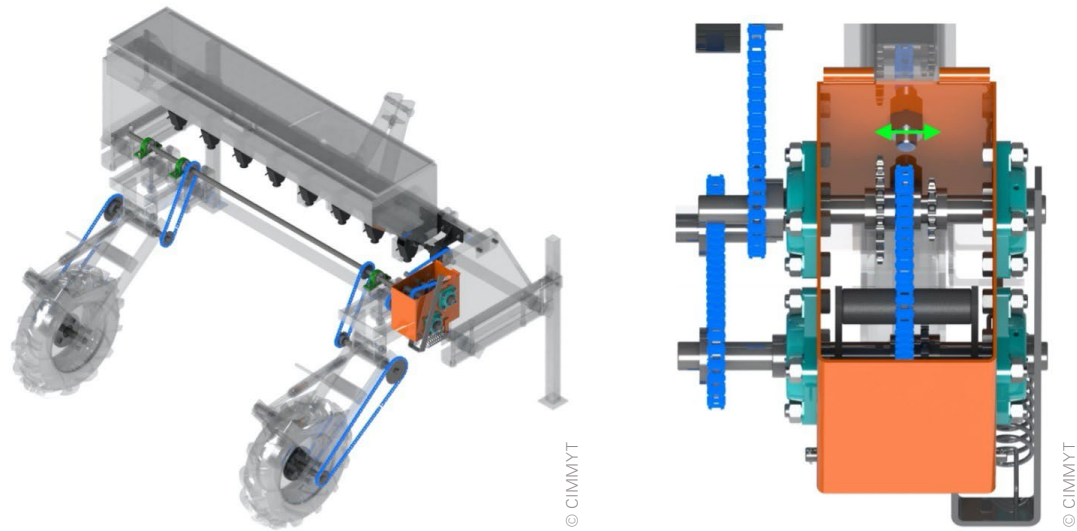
Fertilizer machine with drive train, including principal axle, transmission chains and gearbox for calibration accentuated (left), and close-up view of calibration box with medium gear combination selected (right)
